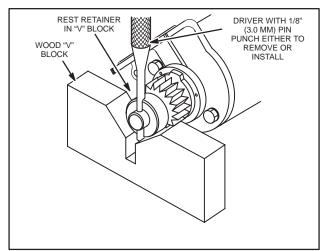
DISASSEMBLING STARTER MOTOR DRIVE
